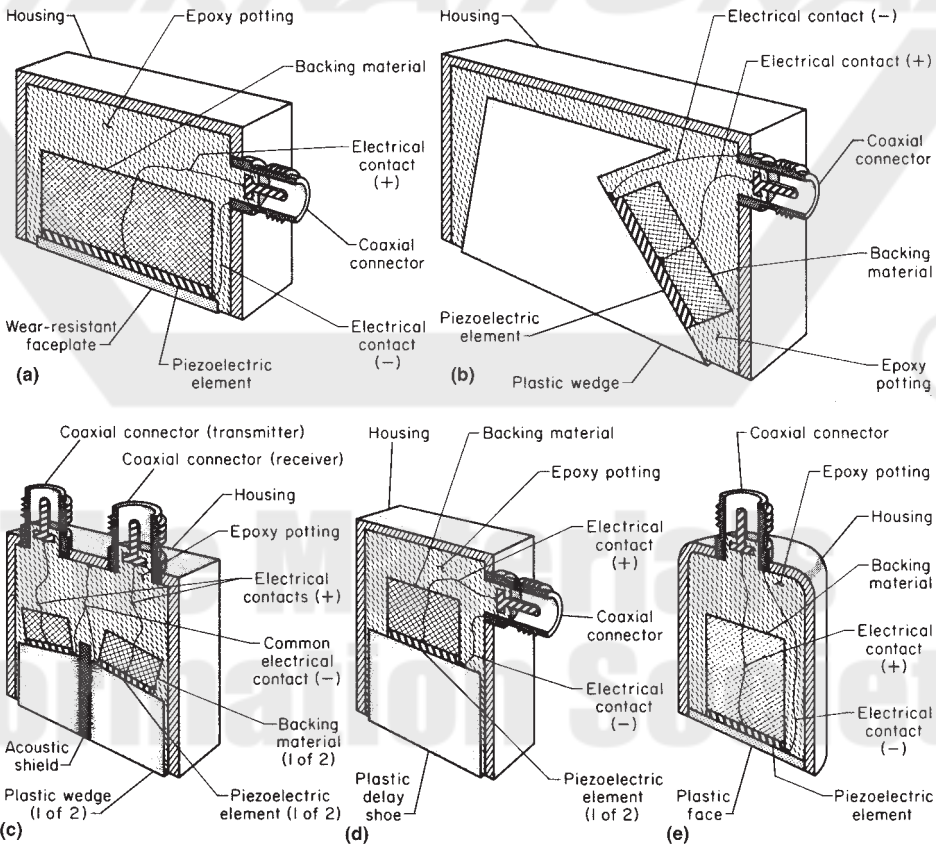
Sectional views of five types of search units used in ultrasonic inspection: (a) straight-beam (longitudinal-wave) contact, (b) angle-beam (shear-wave) contact, (c) dual-element contact, (d) delay-tip (stand-off) contact, and (e) immersion. Source: Ref 1
